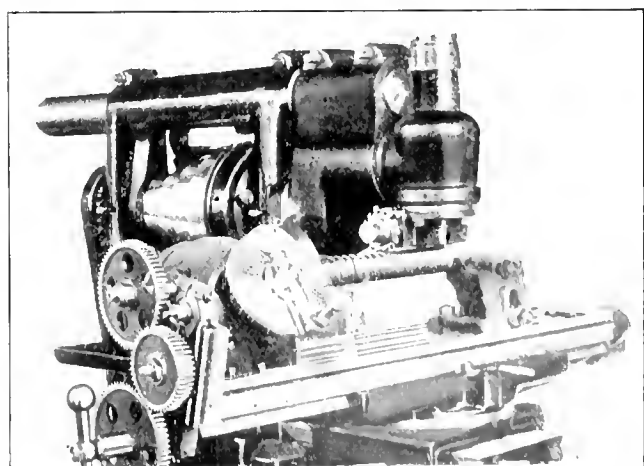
Feed-screw Gearing Directly to Index Head Spindle
